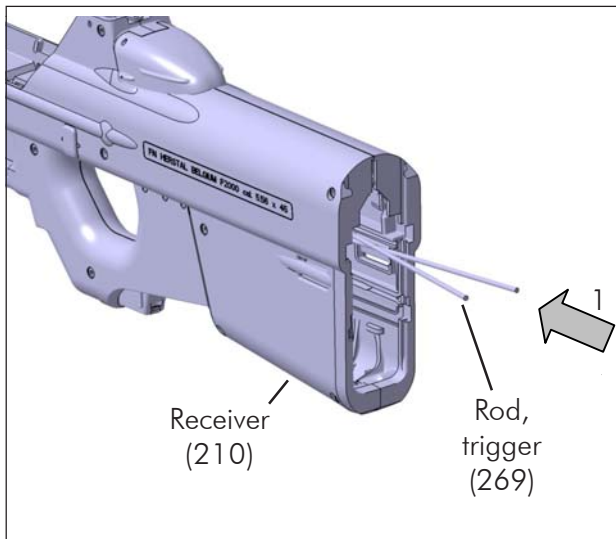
x - Reassembly of the rod, trigger (269)
